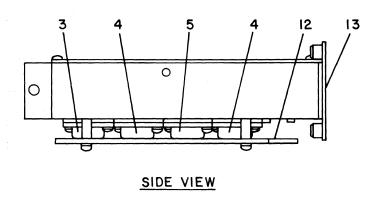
REEL DRIVE ASSEMBLY A4, A9
